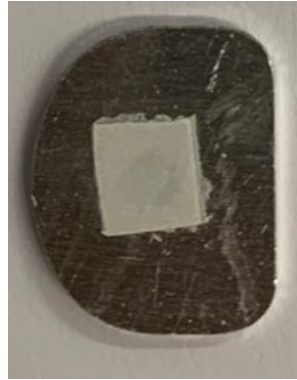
The aluminium endplates after machining and the centre hole patched.
